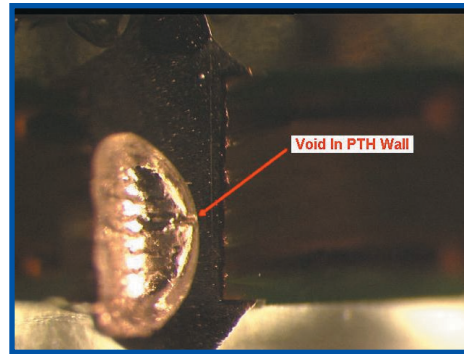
Exploded view of wall imperfection causing the void shown in Figure 6.
